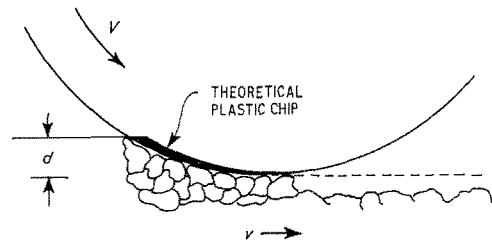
Schematic diagram showing possible differences in mechanism of chip formation under a 46-grit alumina wheel and a 100-grit diamond wheel; the plastic chip is formed by the alumina wheel.
